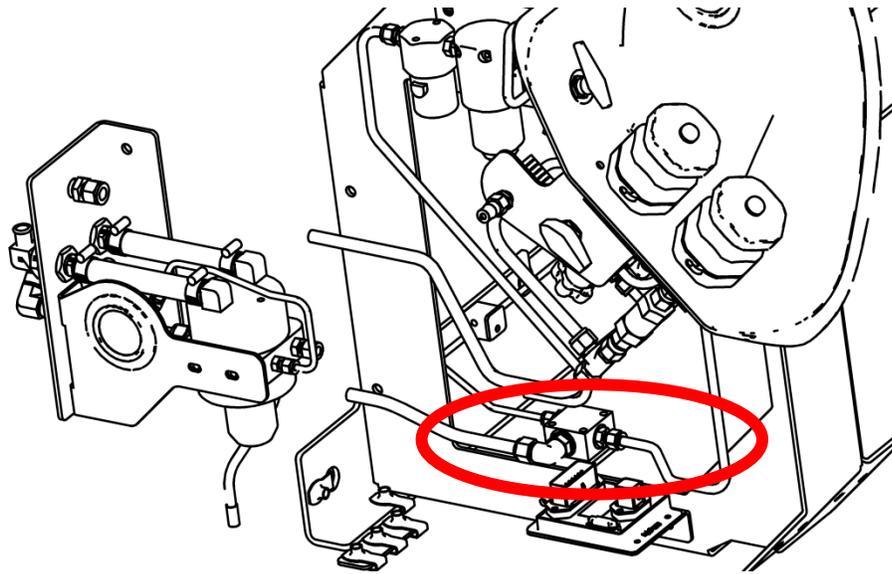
Remove the fuel tubes and three bolts to remove the PRD.
